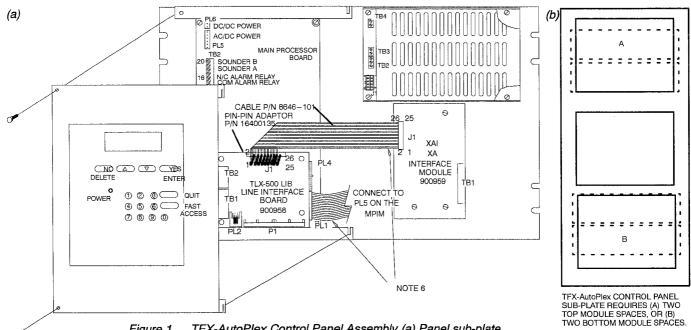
TFX-AutoPlex Control Panel Assembly (a) Panel sub-plate assembly, (b) Sub-plate spacing in control panel cabinet.
